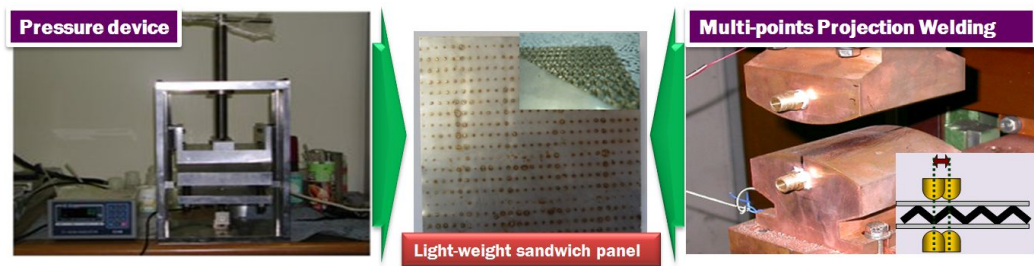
Manufacturing process of the sandwich panel with multi point resistance welding
